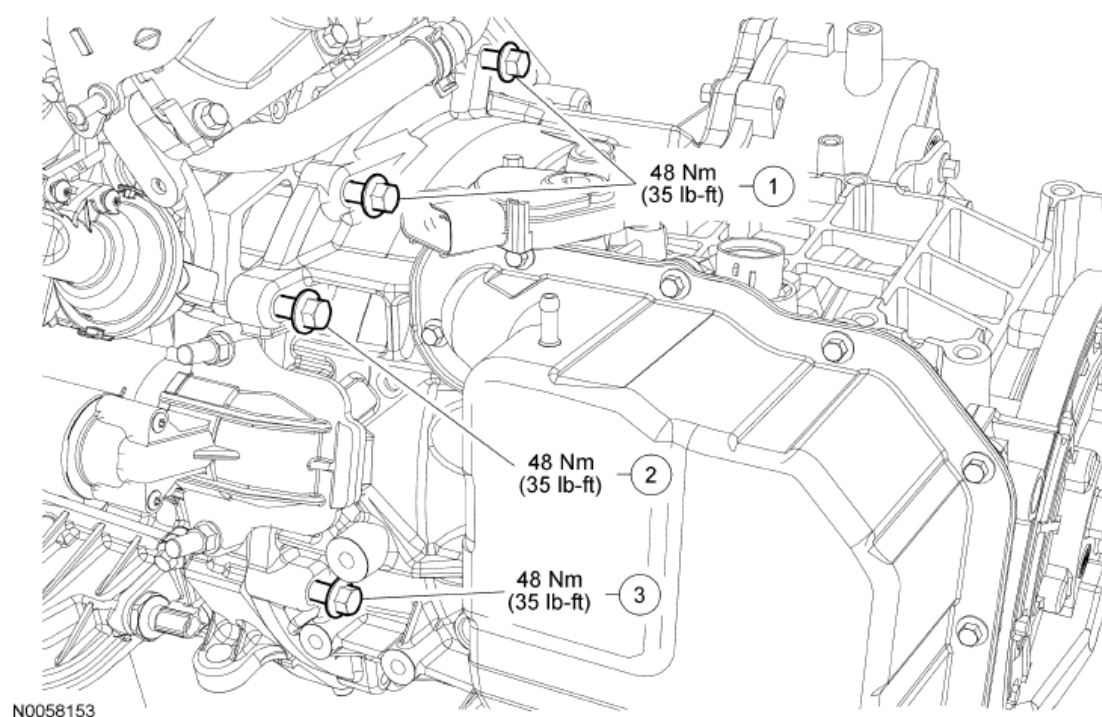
Identifying Bellhousing-To-Engine Bolts
